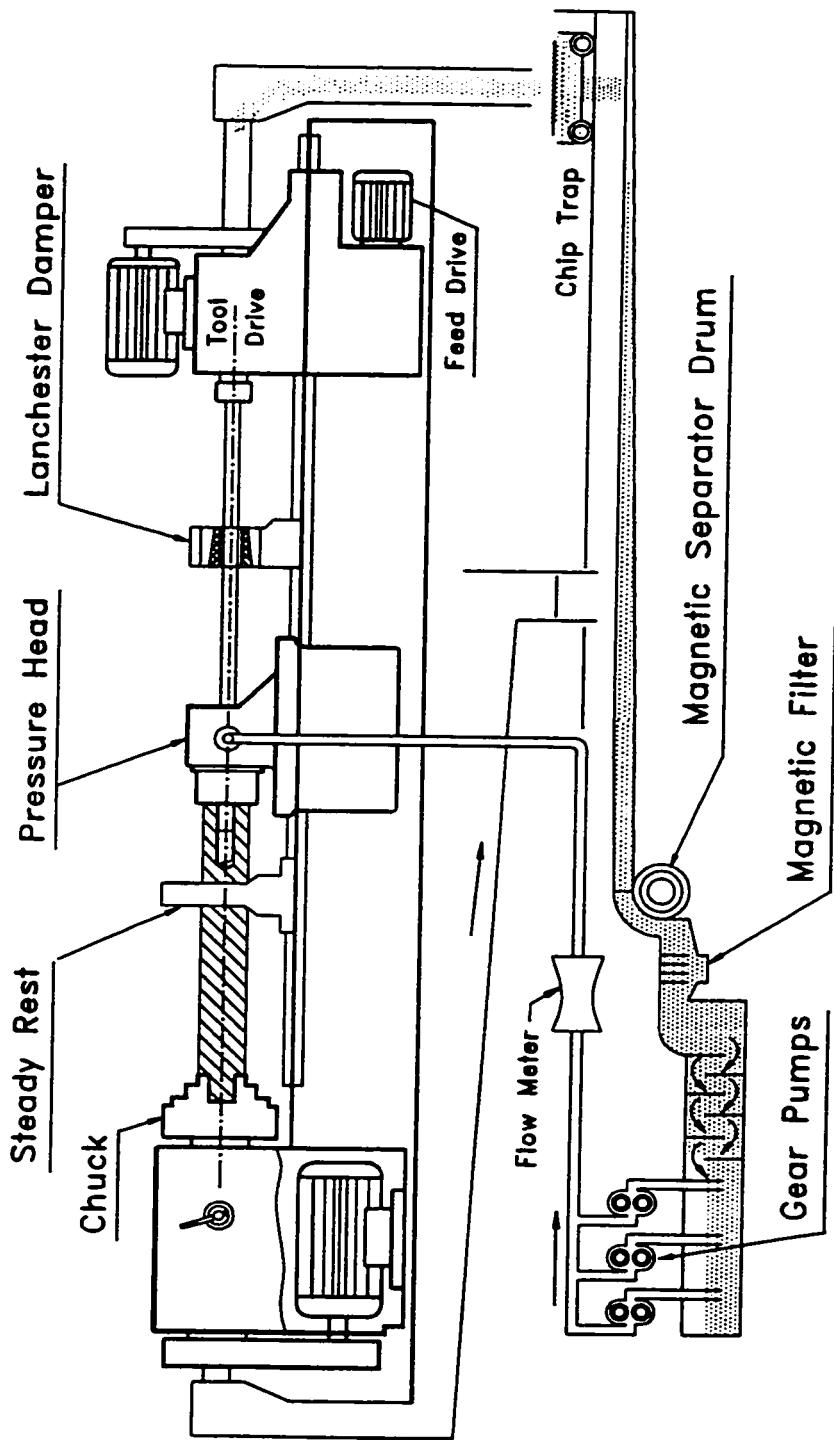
Machine Tool for BTA-Type Deep Hole Machining
